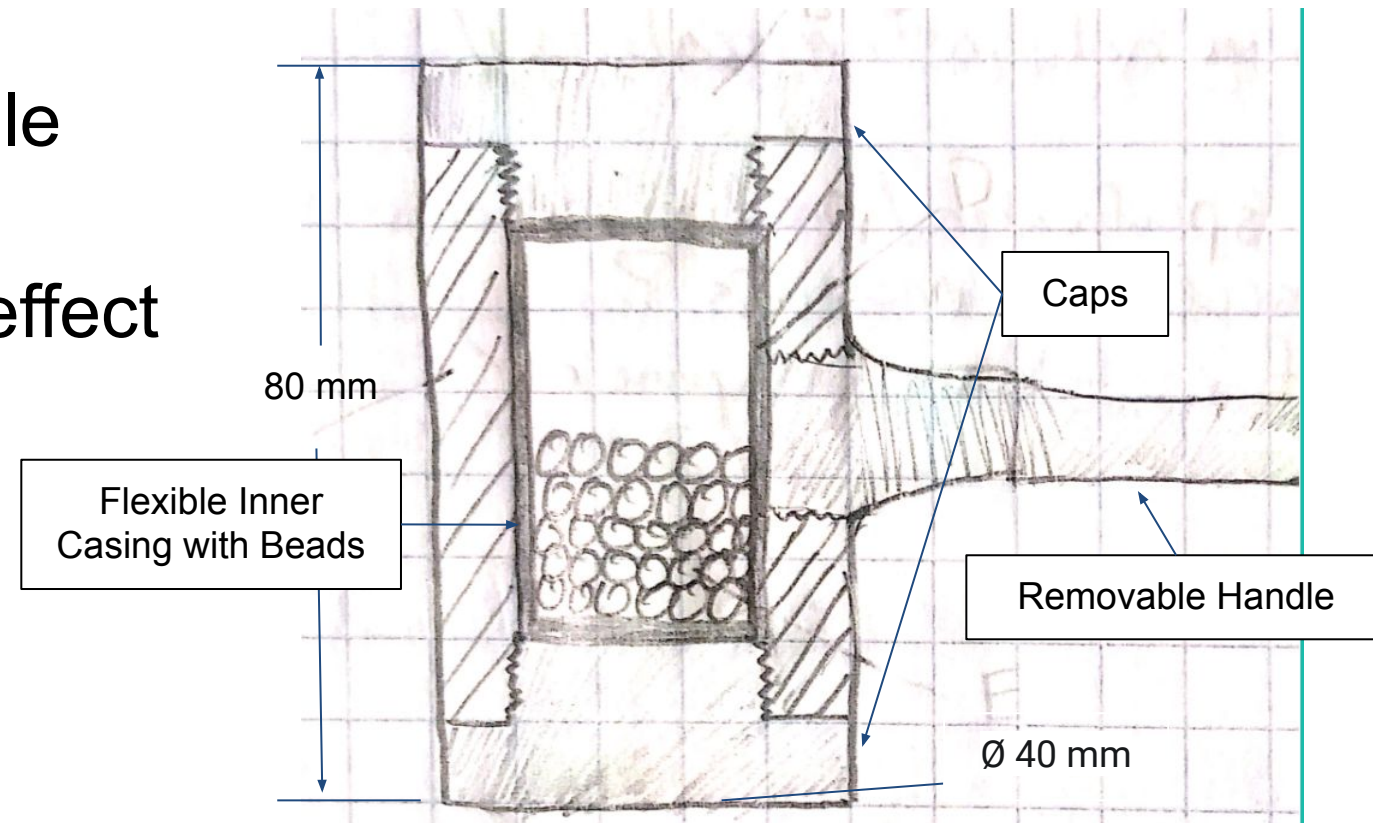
Hand-drawn design of an orthopedic dead-blow mallet with fully replaceable parts and metal bead media.
